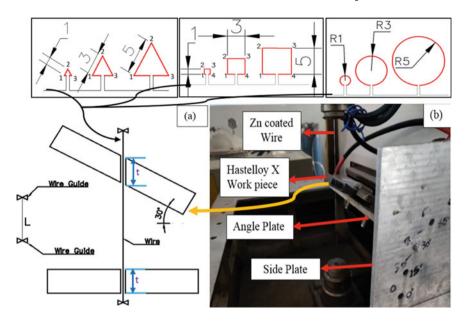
a Workpiece at different slant angle by slant fixture, b slant fixture
